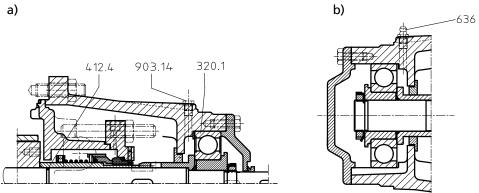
a) Drive-end bearing on Multitec 32 - b) Grease lubrication with lubricating nipple, non-drive-end, sizes 100 and 125
